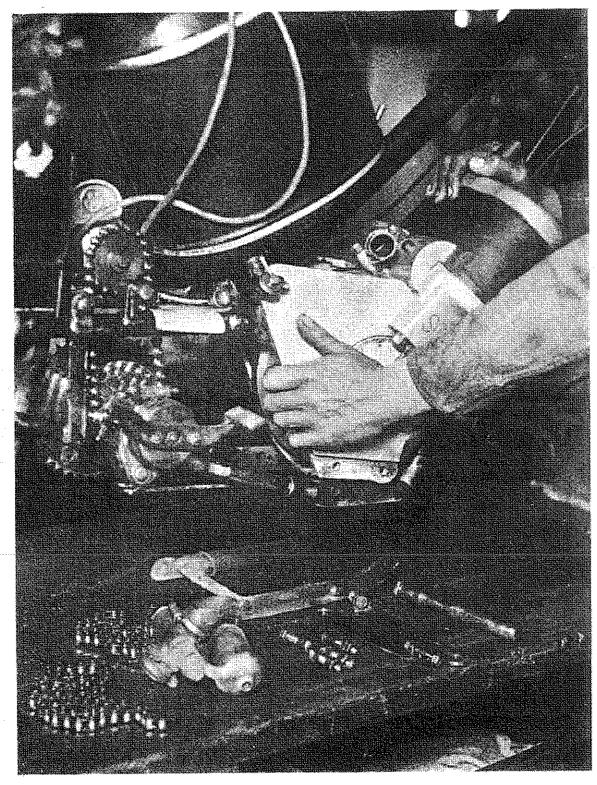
LITTING SUPER ENGINE OUT OF FRAME.
